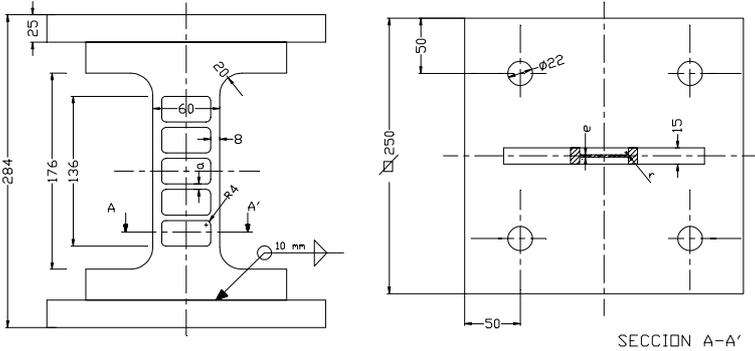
Shear link dissipator manufacturing drawings used for the tests specimens
